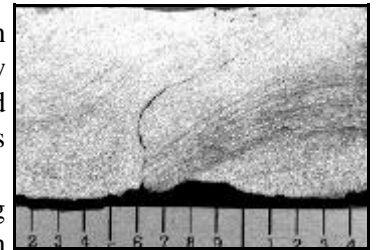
Cross section of a lap-weld showing a large existing flaw
